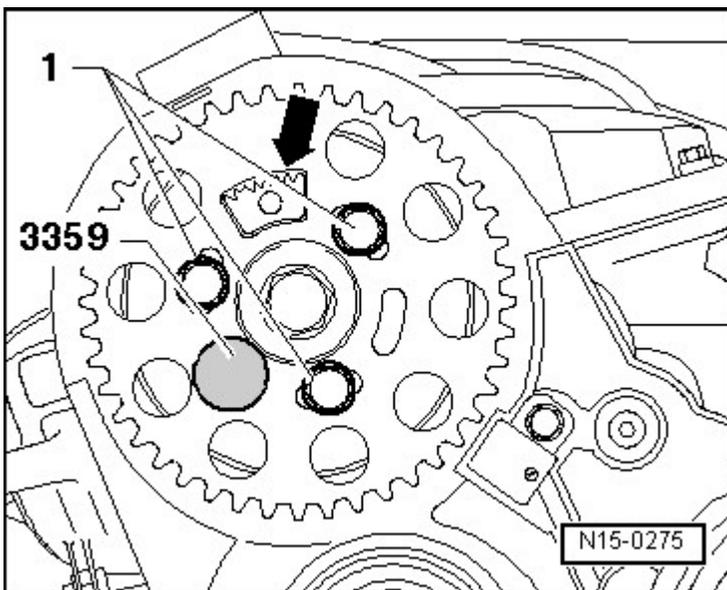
Identifying Camshaft Pulley Bolts And Toothed Segment -Arrow- Must Point Upward
